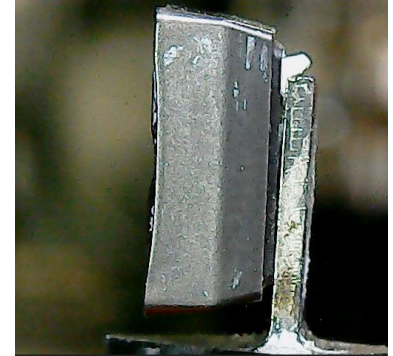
Cast Iron – Tools – LN2 – Drilling.
